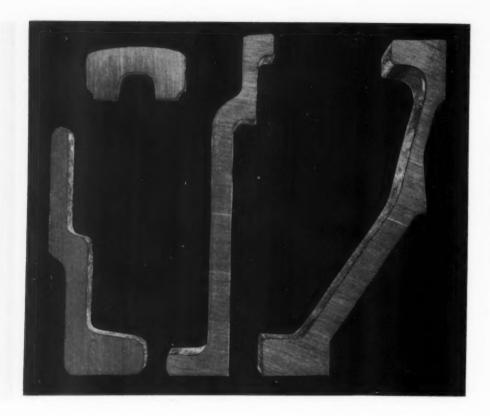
Solids and shapes are also possible. Smallest extrusion is for door frames of type 304 stainless. Larger sections, for aircraft use, are: type 310, left; AISI 1020. center; and 8620, right
